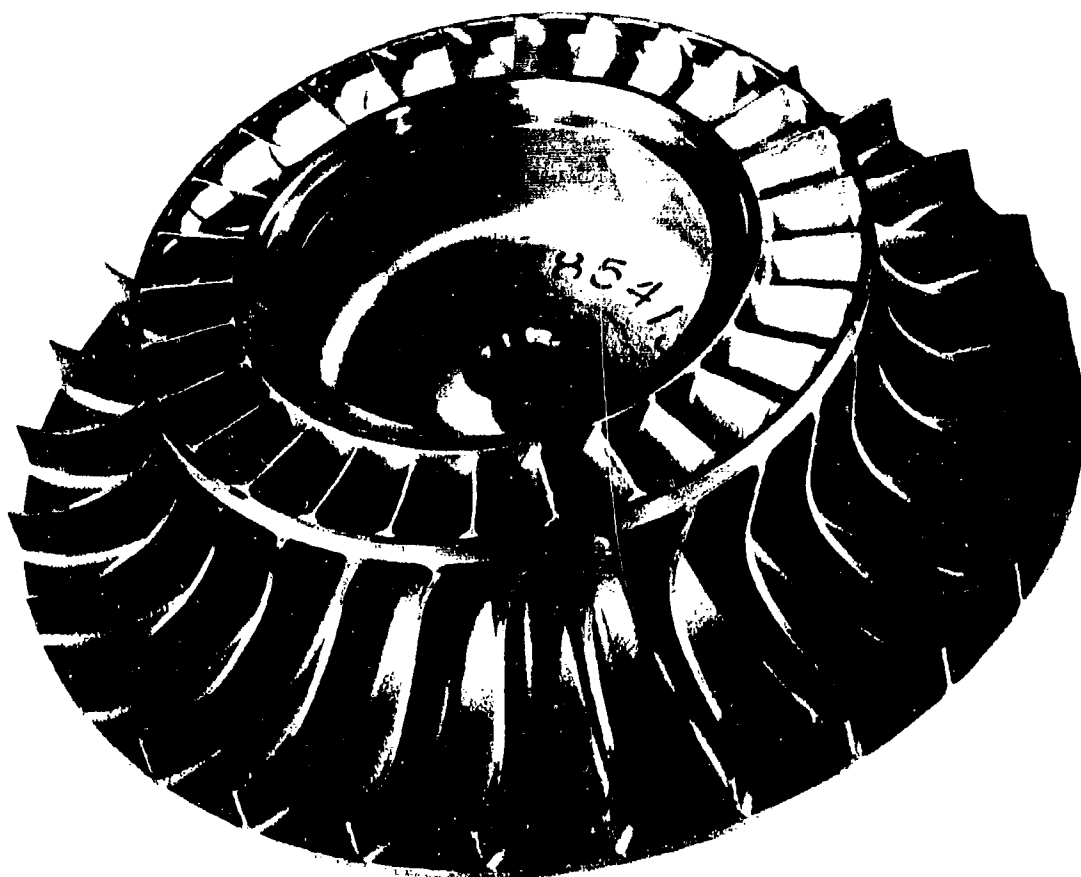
T63 impeller casting (Magn 1X) Neg. No. 8-26068
